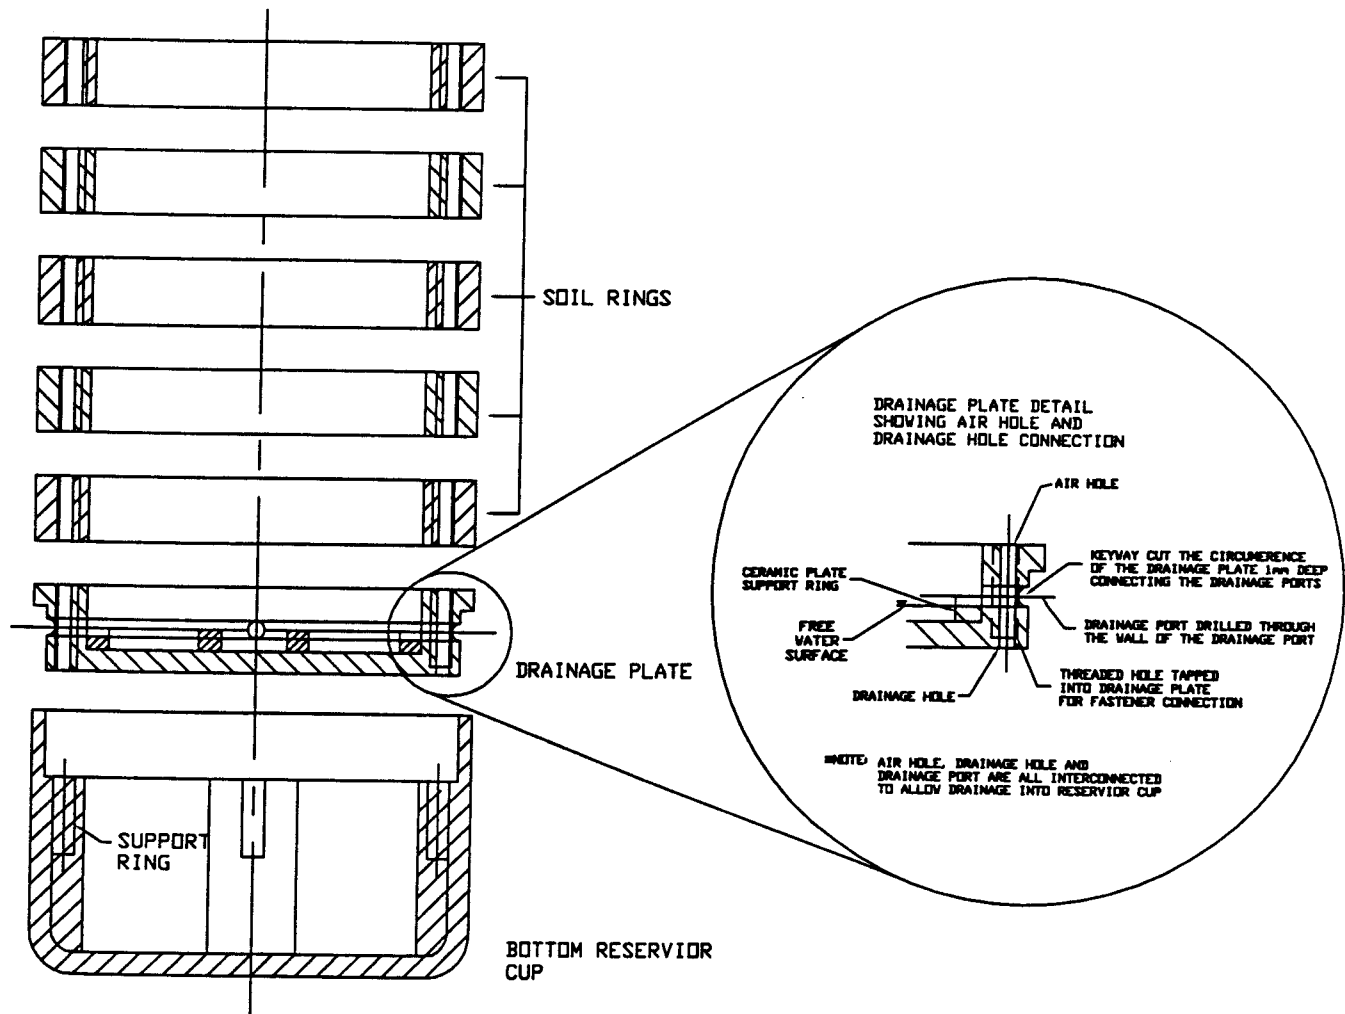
Centrifuge Soil Specimen Holder Cross-Section
